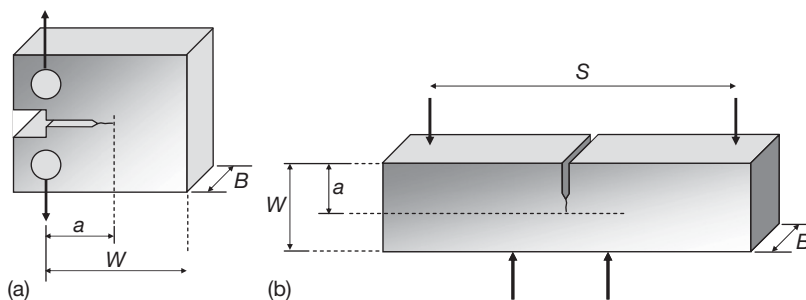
Schematic illustration of fracture mechanics test specimens (a) compact-tension specimen and (b) four-point bend specimen. Note arrows indicate direction of loading.
